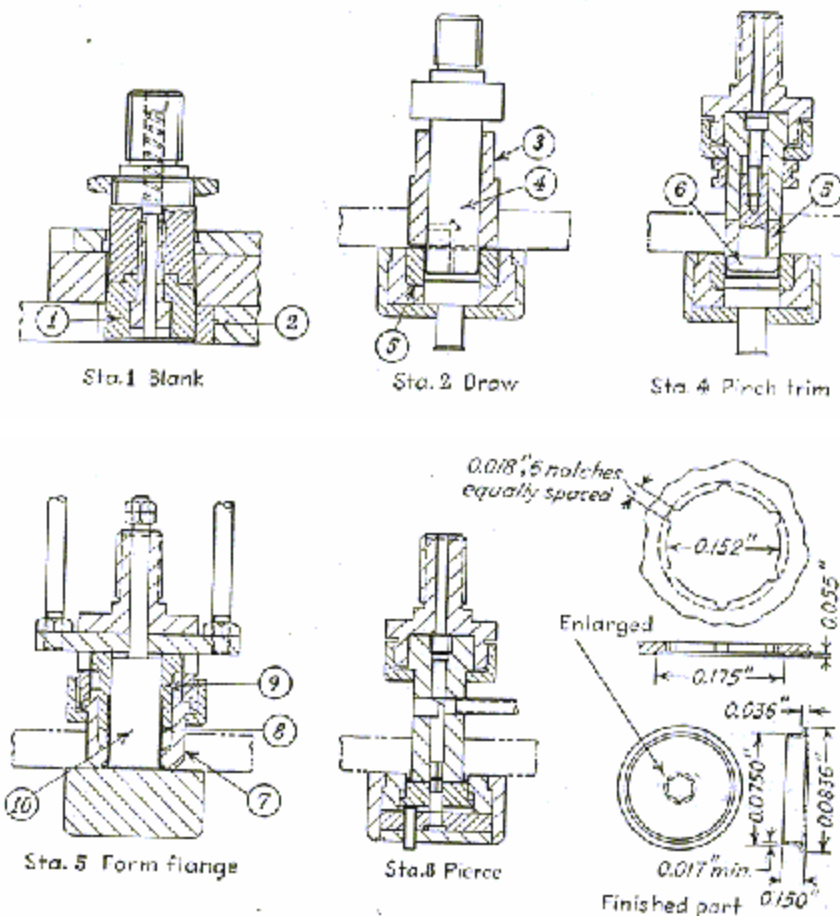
part drawing and dies to produce 0.5 mm thick brass barrel on an eyelet machine.
